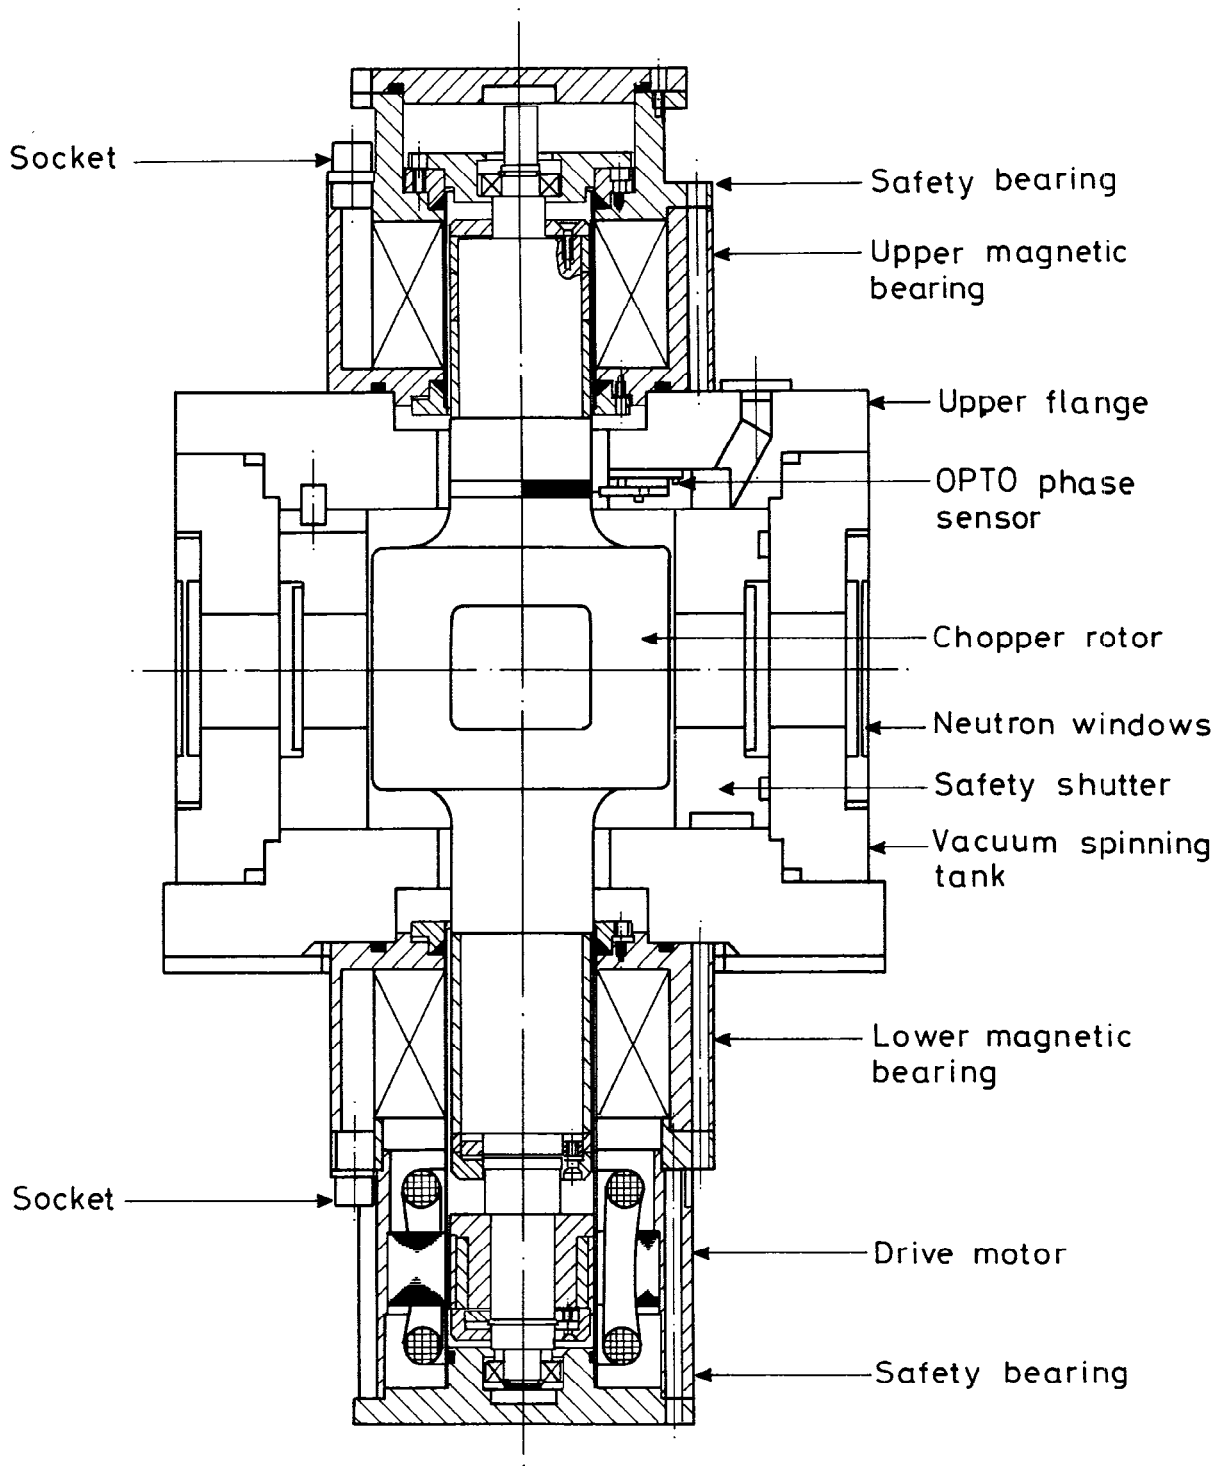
Sectional Assembly Drawing of the HET magnetically suspended chopper.
